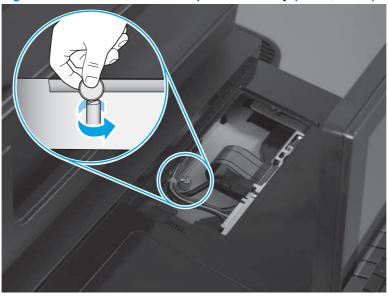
Remove the control panel assembly (M880; 4 of 8)
